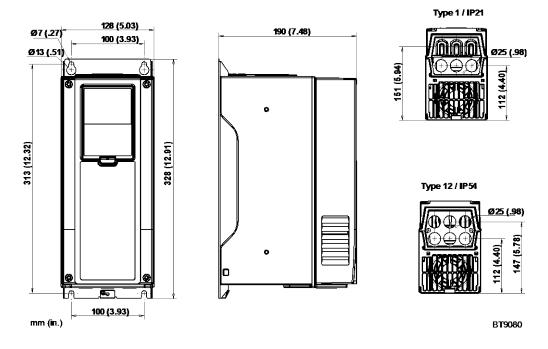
Siemens Drive Dimensions, FS4, Wall-Mount.
